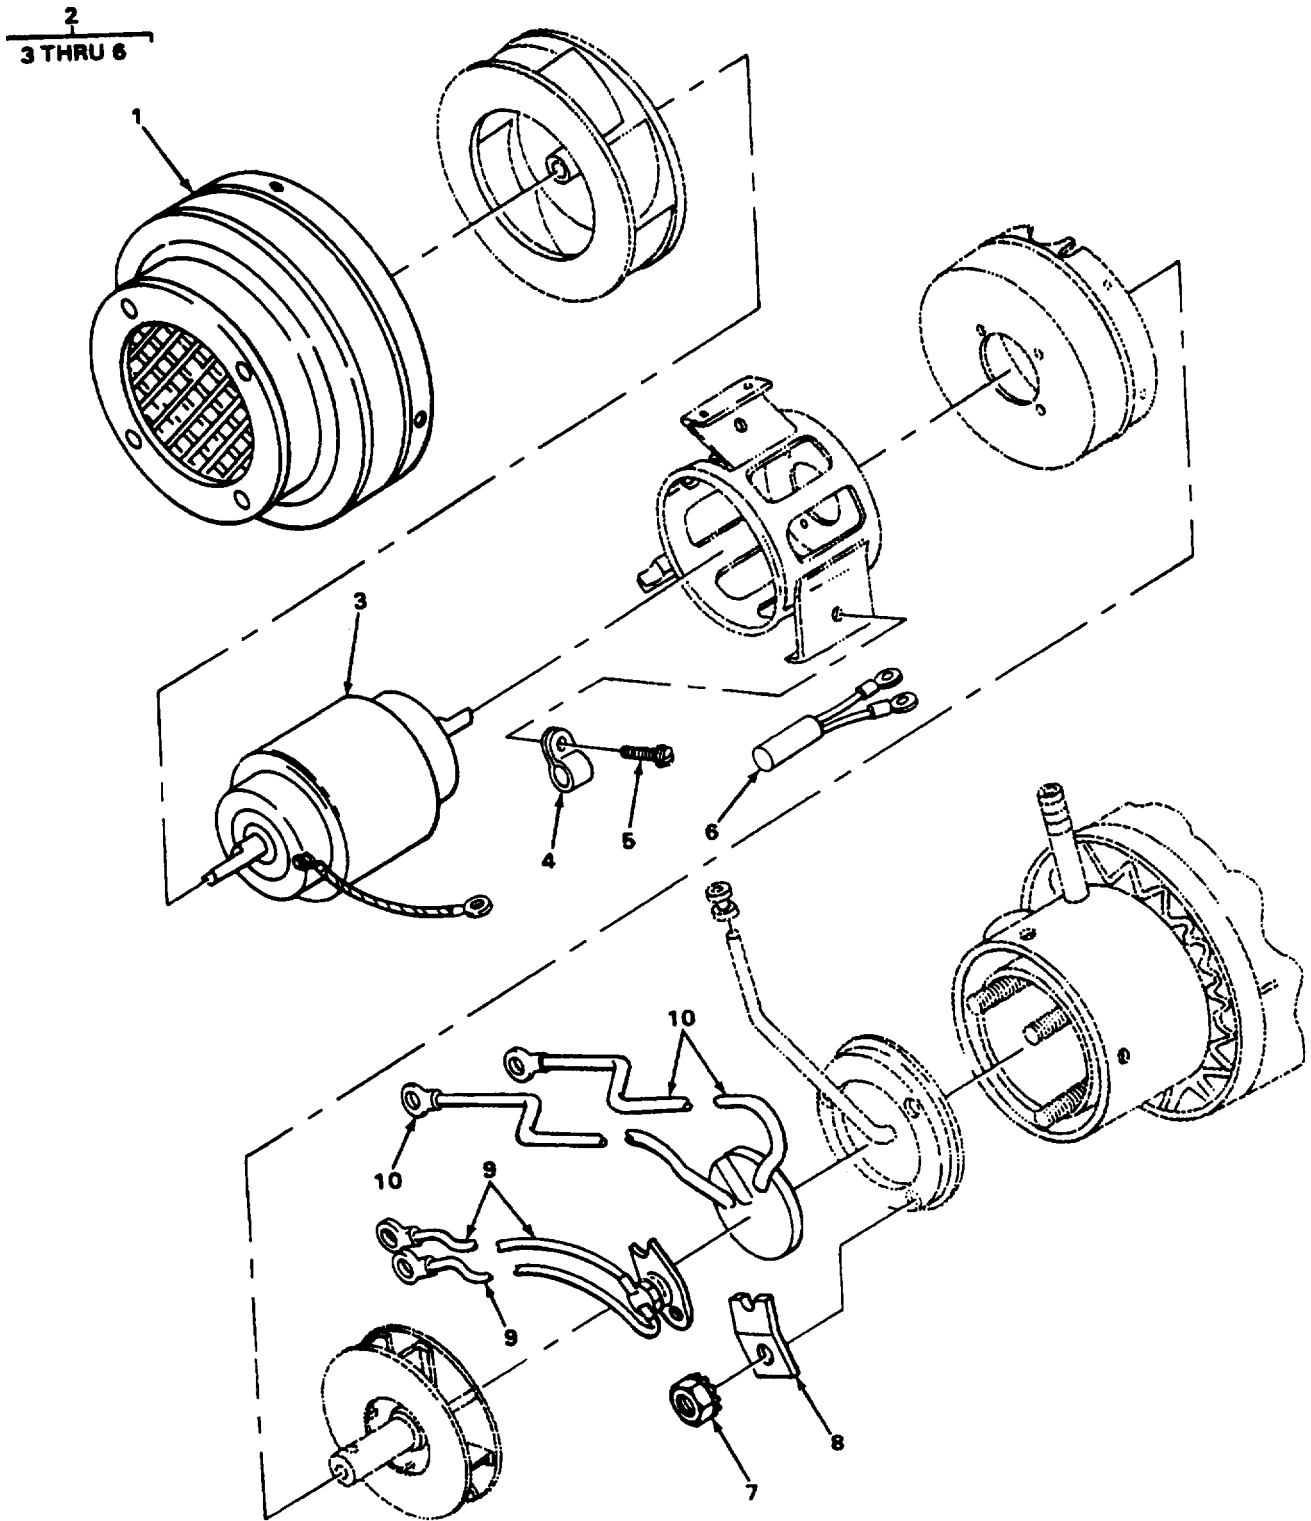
HUPP MODEL MF60A-24V PREHEAT ELEMENT, BURNER THERMOSTAT, BLOWER ASSEMBLY AND MOTOR.
